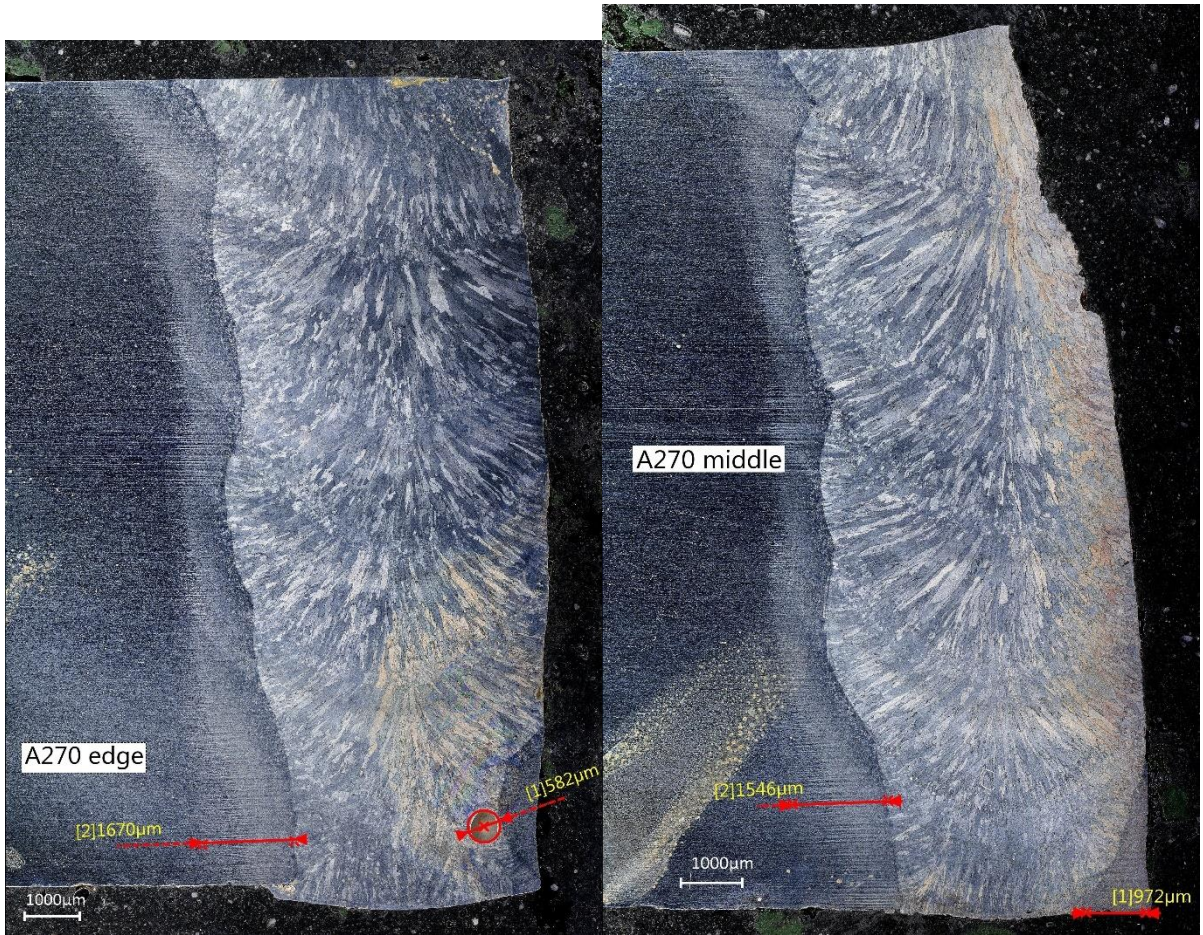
Figure V. Macrographs of the specimen A-270 full weld, view from the edge (left) and middle (right) planes.
